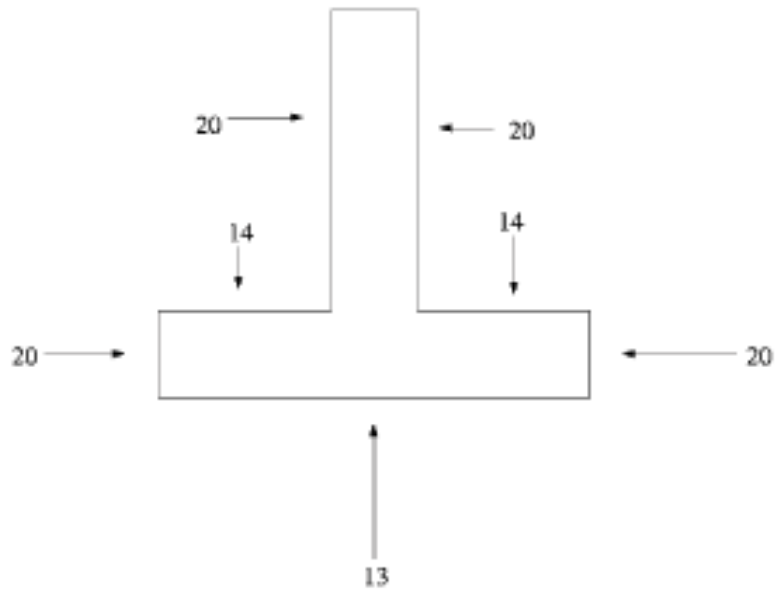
Cross-section view of face types for the second valve. Note that the edges of the valve and the valve stem are solid.
